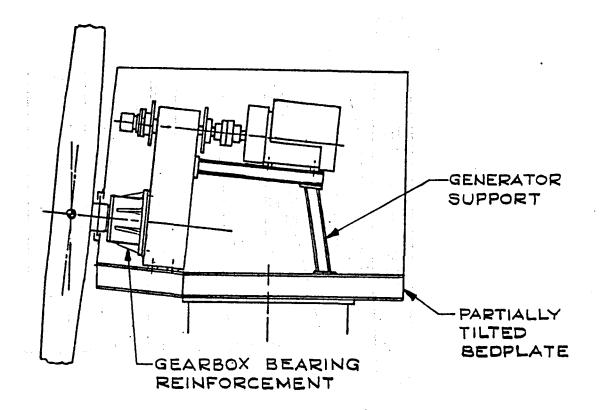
Concept 2: Gearbox on-end with the front of the low speed shaft reinforced to support the rotor
